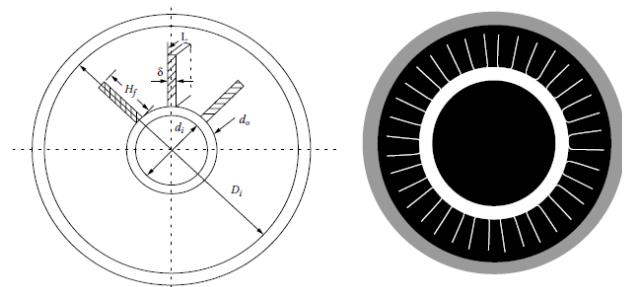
Cross section of a longitudinally finned inner tube heat exchanger and nomenclature of the initial parameters.
